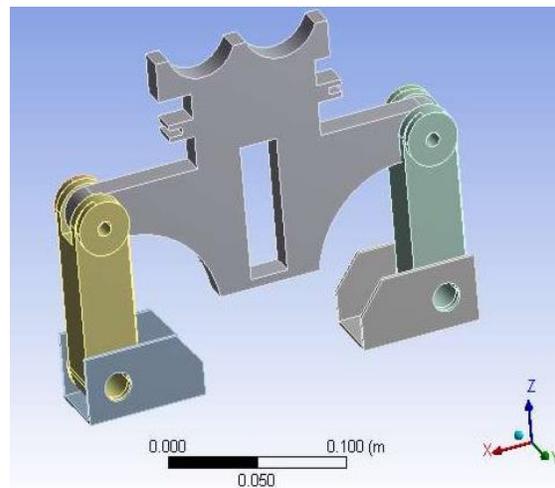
Imported assembly CATIA(.stp) in ANSYS
